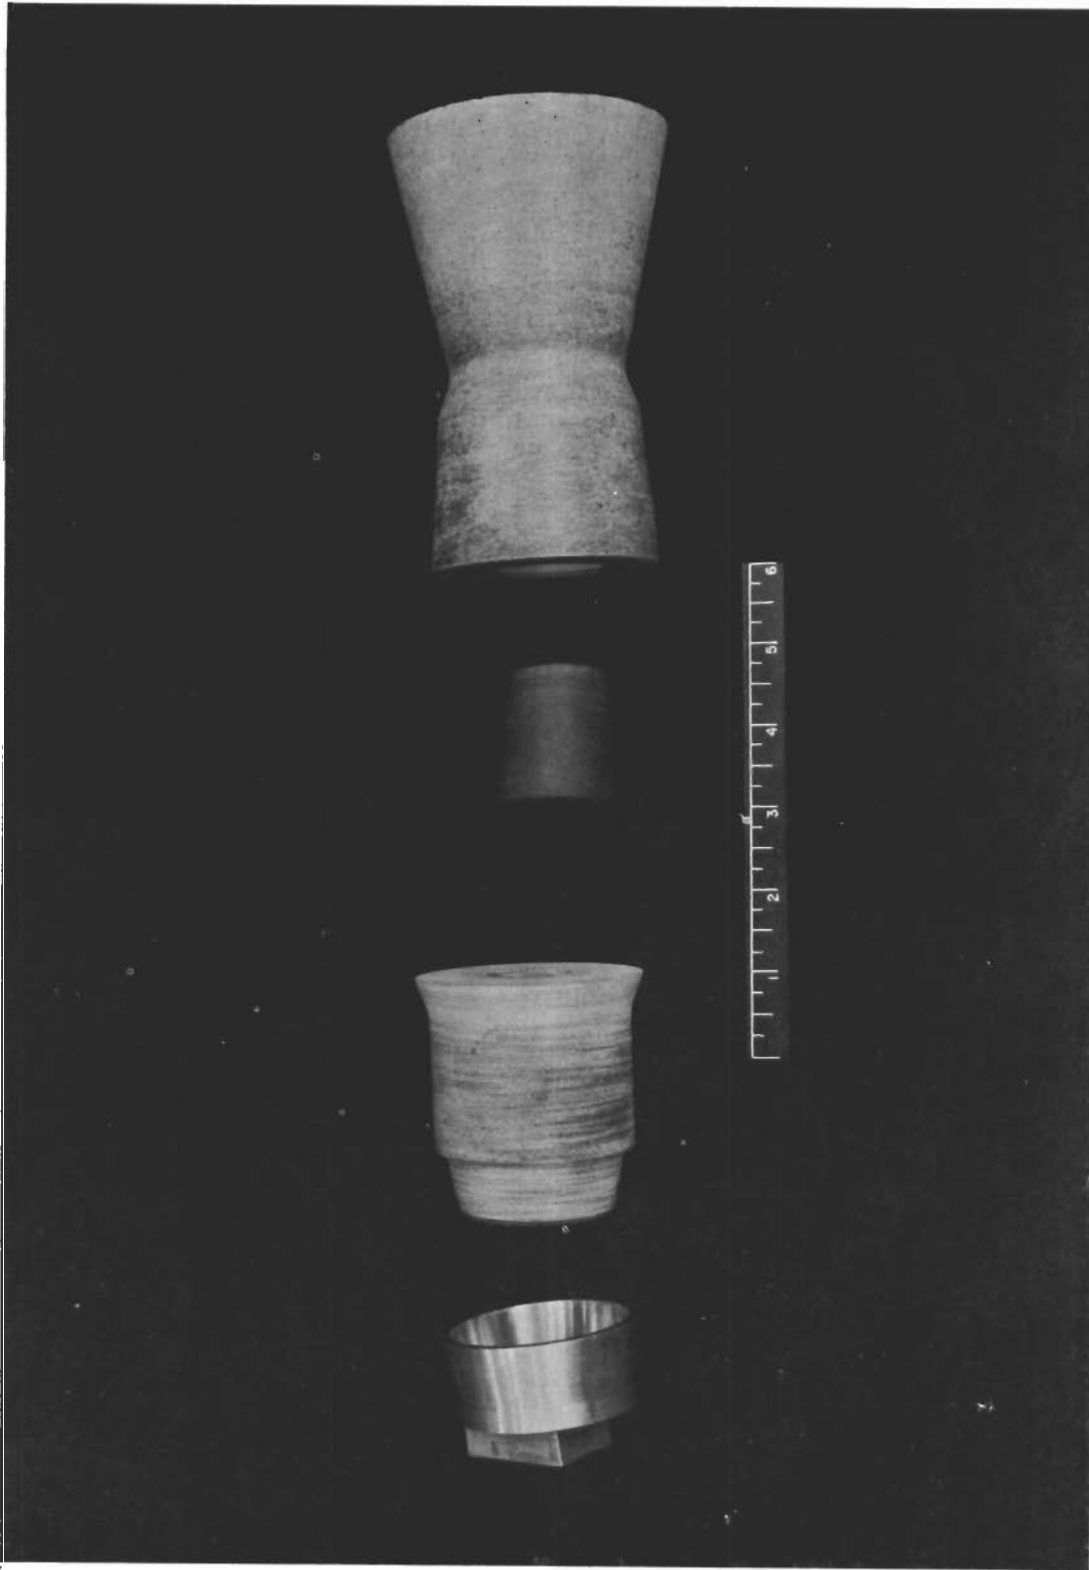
Exploded View of Uncooled Rocket Motor for Space Altitude Control
